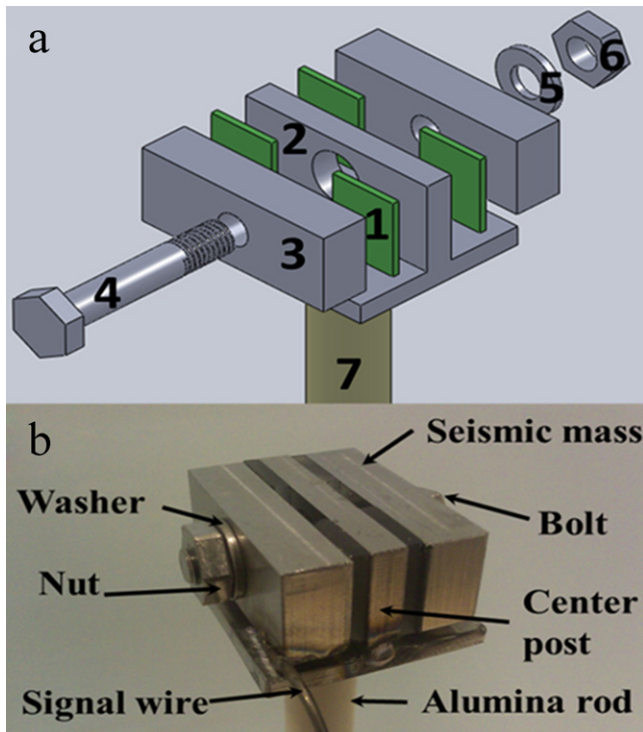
(a) The expanded view of the sensor assembly and (b) assembled prototyped shear-mode accelerometer.
